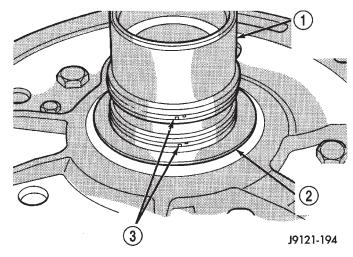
Reaction Shaft Support Seal Rings And Front Clutch Thrust Washer
